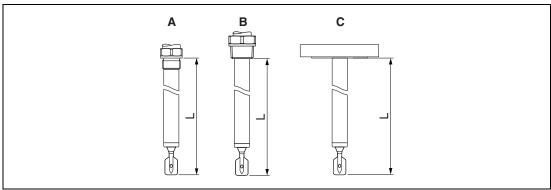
Probe designs: pipe extension, short pipe, sensor length L
